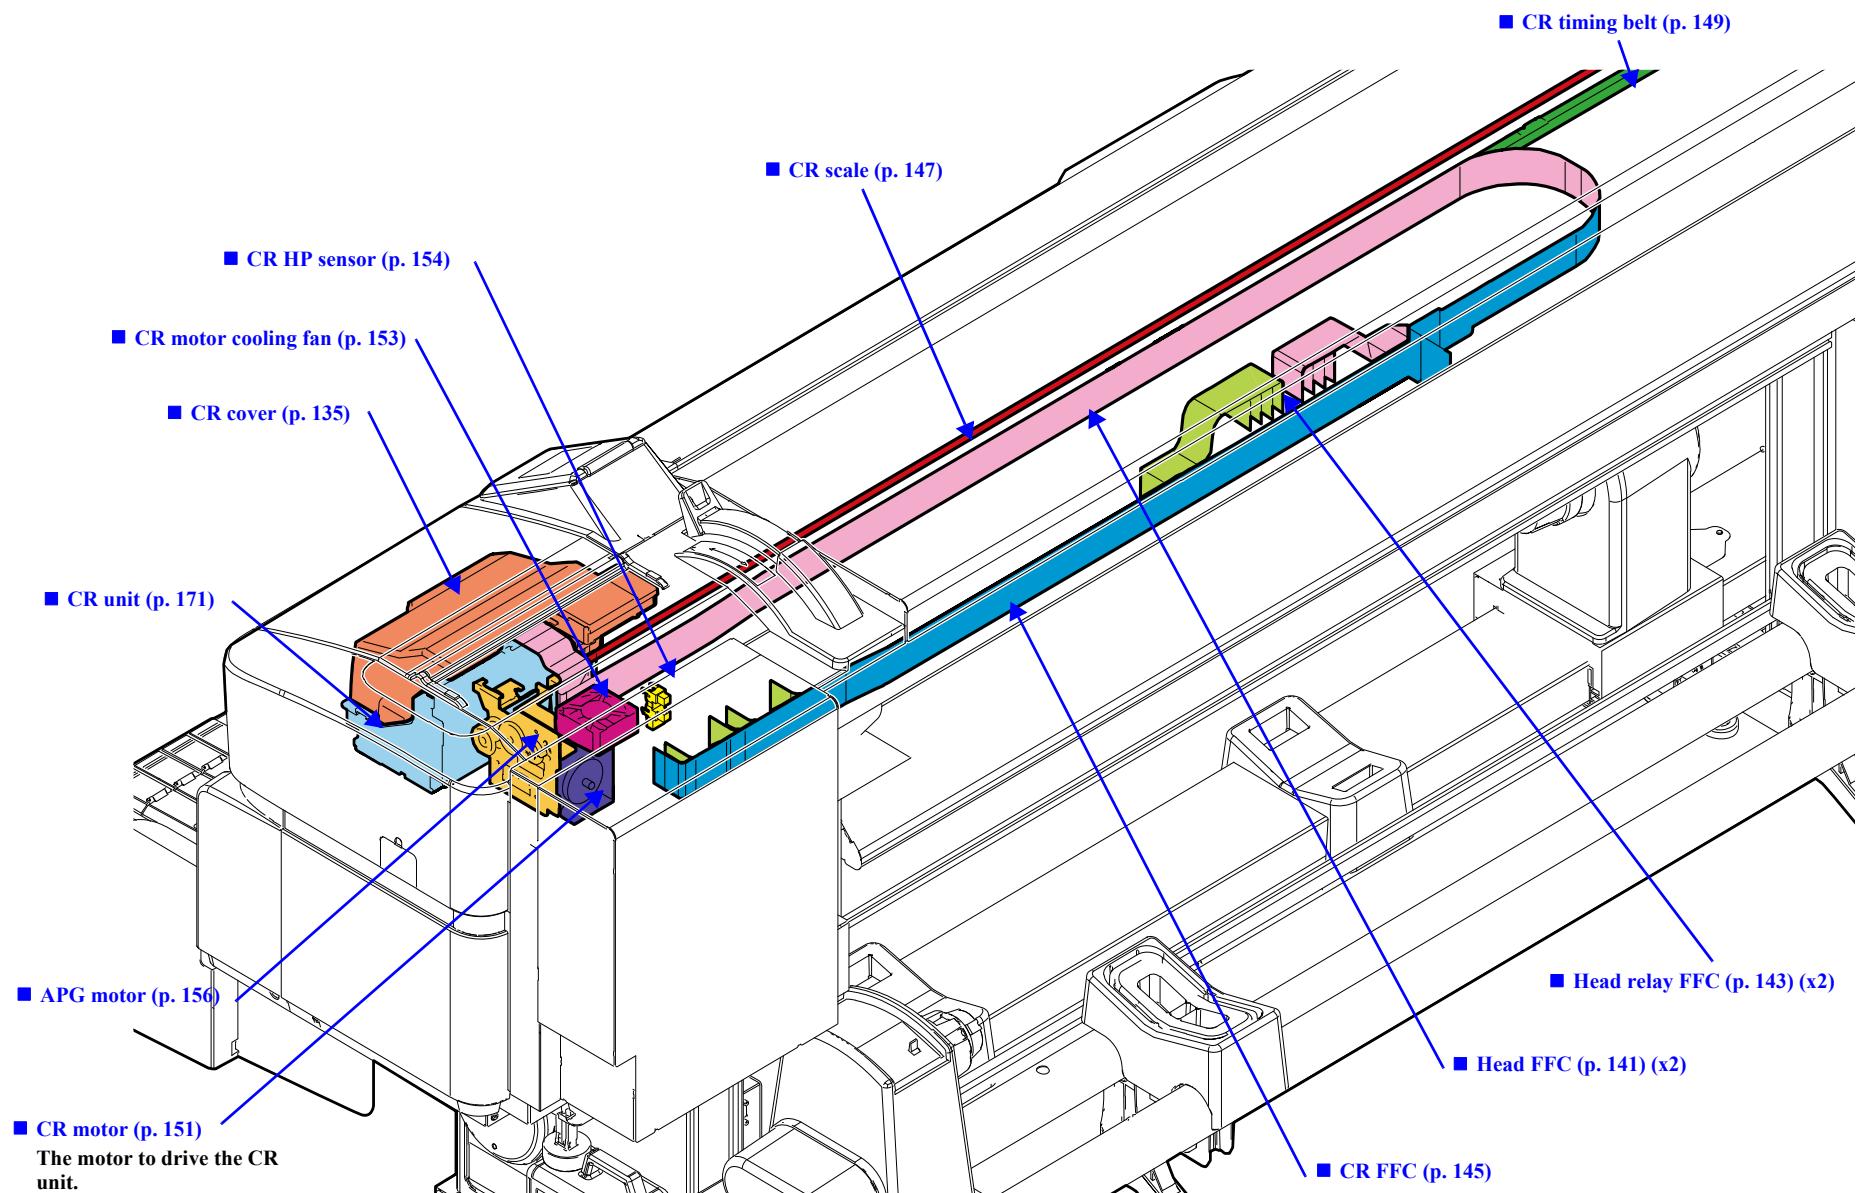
Carriage Mechanism/Ink System Mechanism
